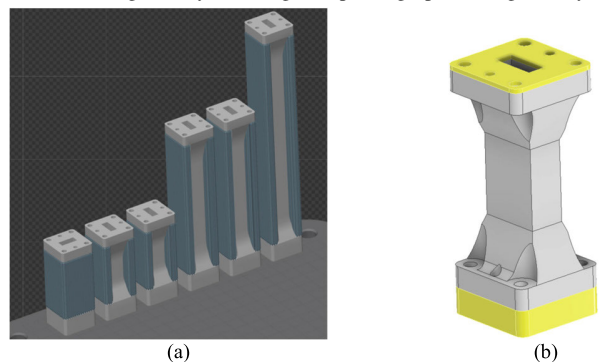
Test vehicle orientation on the print bed with supports added (a) is set in the slicing software. Exemplary test vehicle view where yellow color indicates stock in the flange region that is removed and machined with CNC after detachment from building plate (b).
